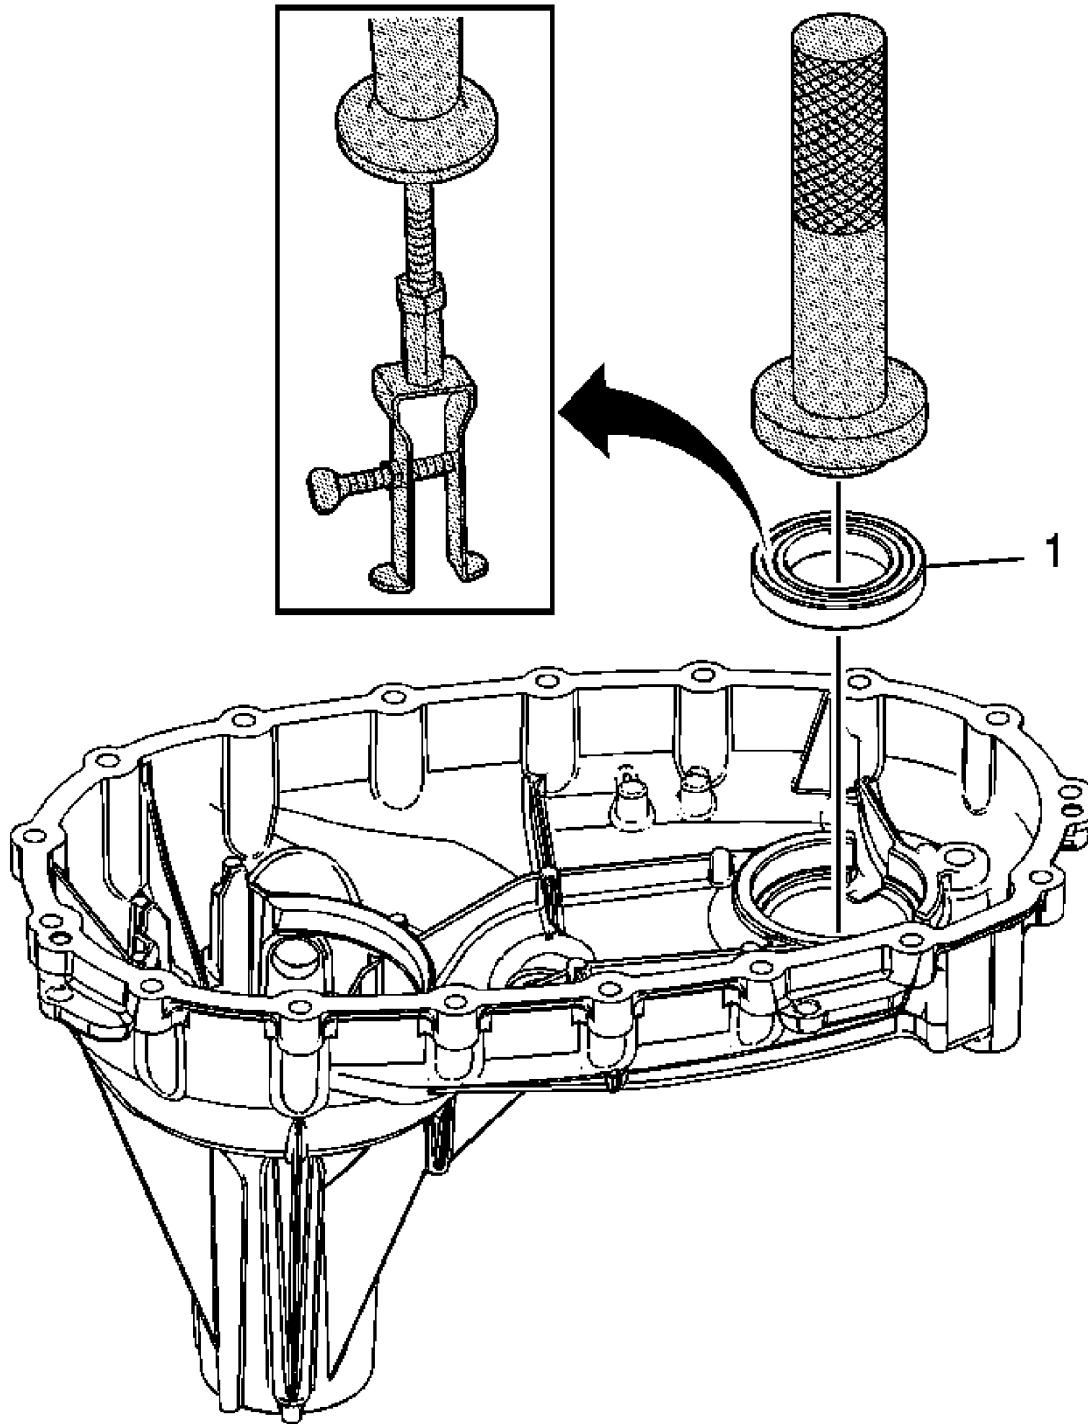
View Of Reaction Carrier Shaft Rear Bushing
